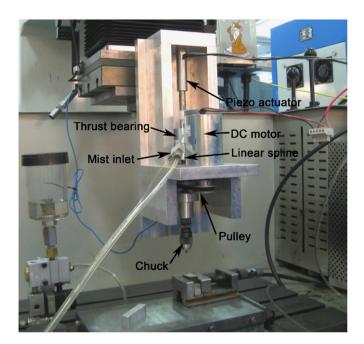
Fabricated spindle and accelerometers mounted on spindle.
